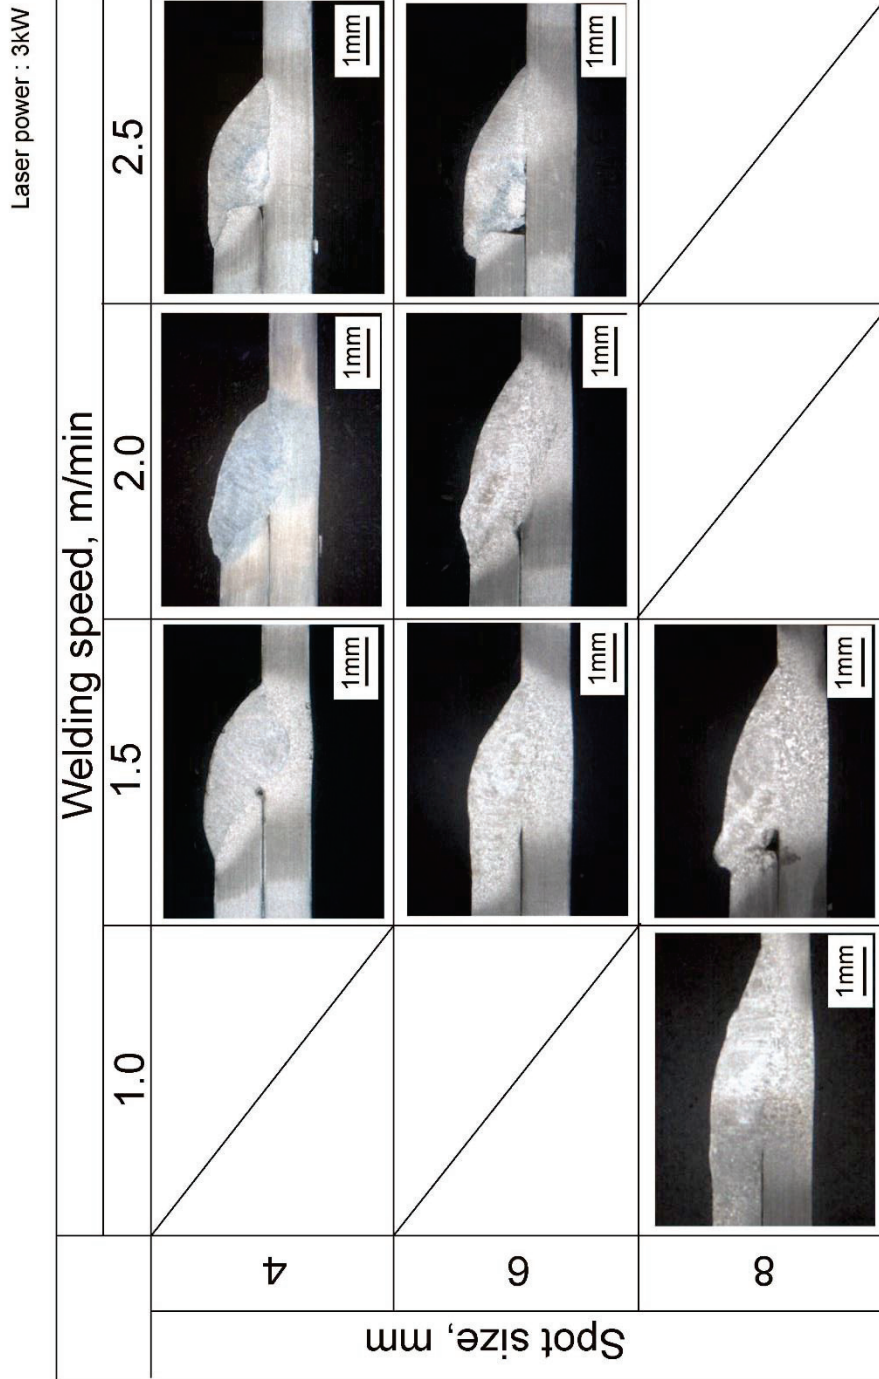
Cross sections of weld beads ($t=1$ mm).
